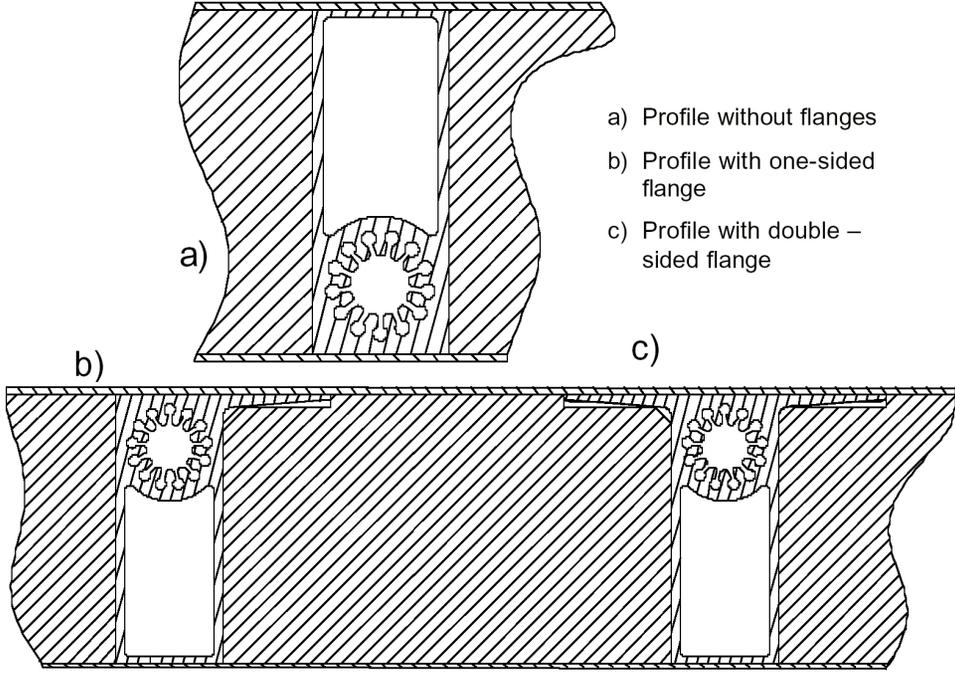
Main Dimensions Heat Pipe and Panel Layout
